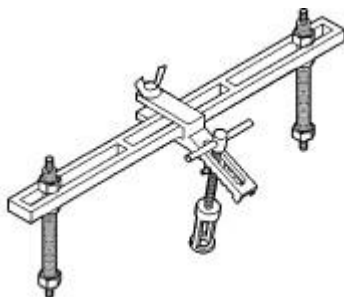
COMPRESSOR, VALVE SPRING - MD998772A
